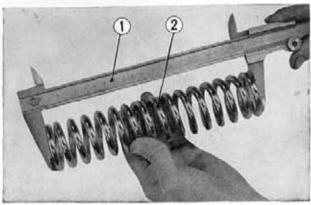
① Vernier caliper ② Rear cushion spring
